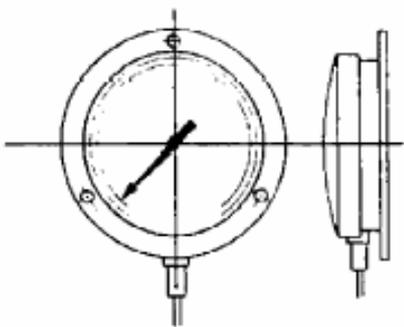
SURFACE MOUNTING WITH BOTTOM CAPILLARY ENTRY
